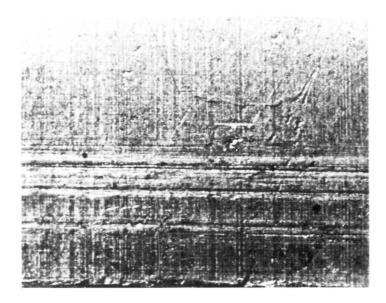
Surface and Edge to be Welded of E-139 Bomblet
